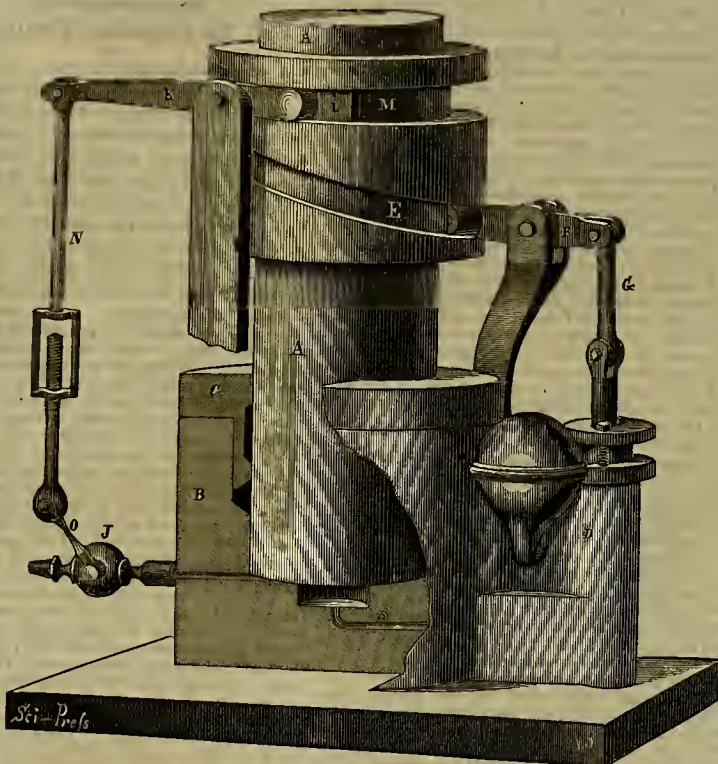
VERTICAL SHAFT WITH HYDRAULIC BEARING.
